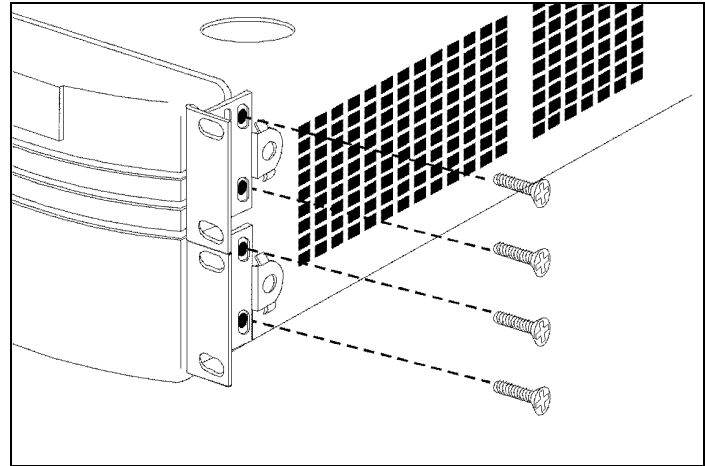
Attaching mounting brackets to the Enterprise Monitor
